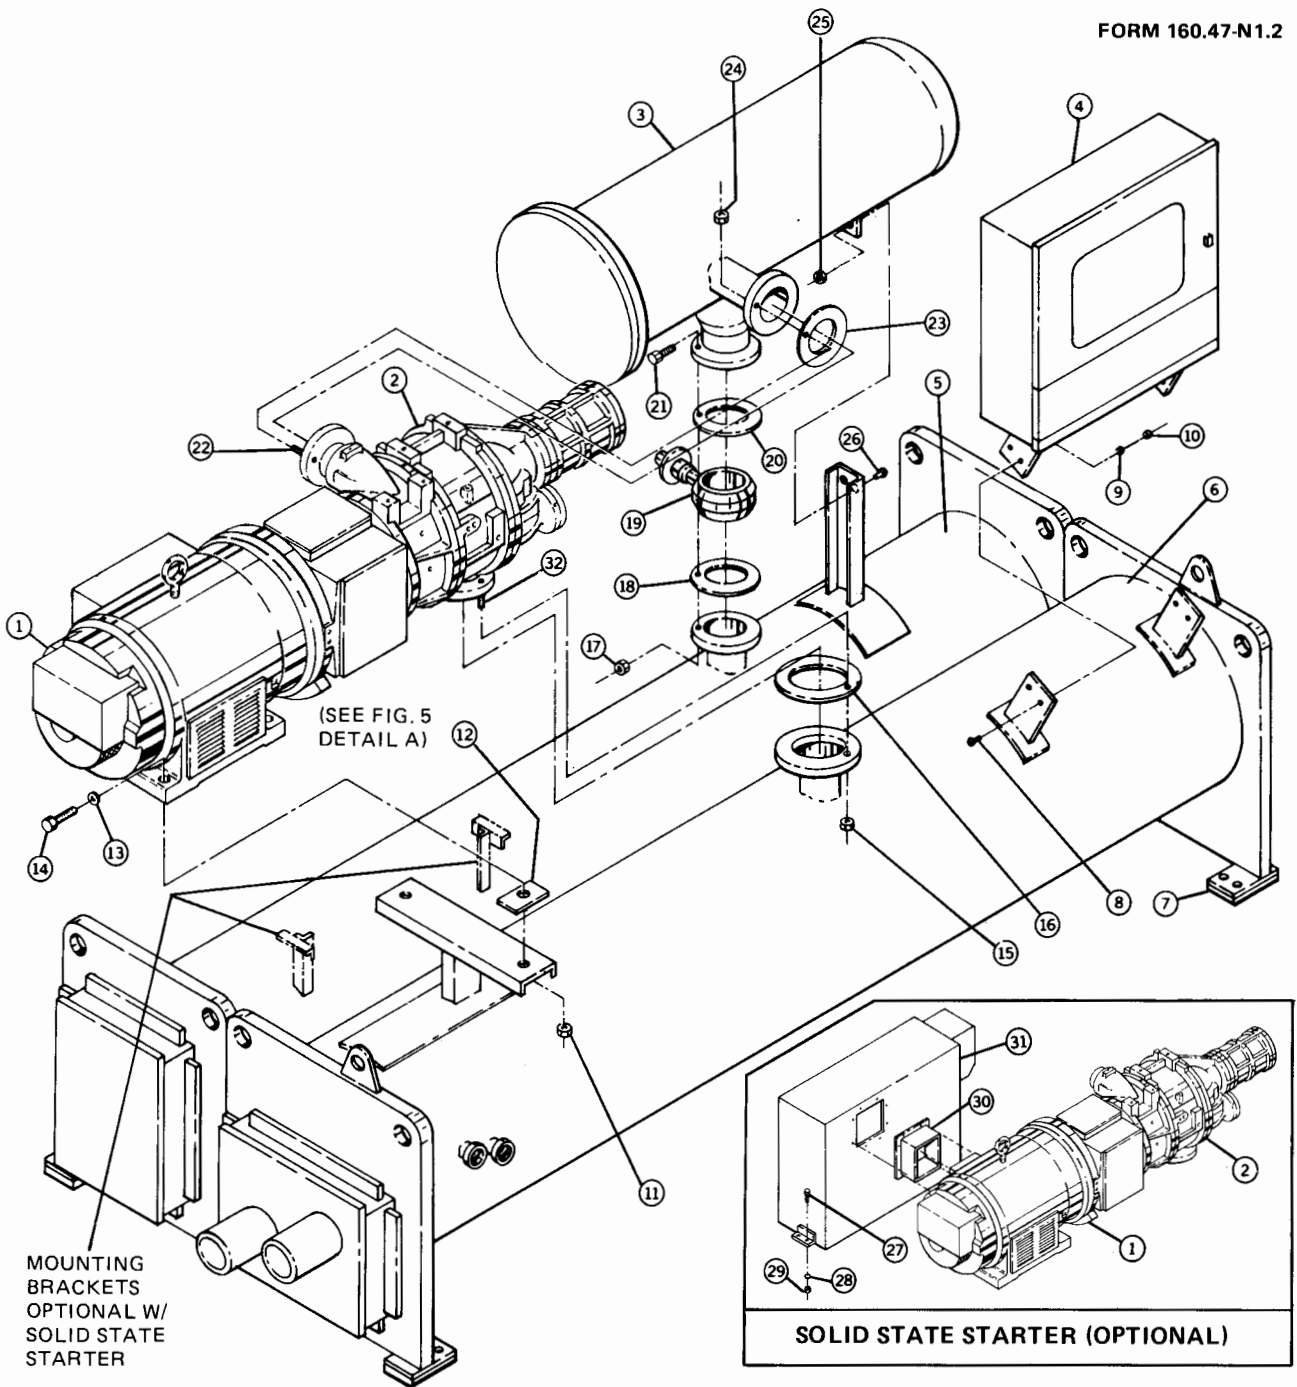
RIGGING COMPRESSOR ASSEMBLY
